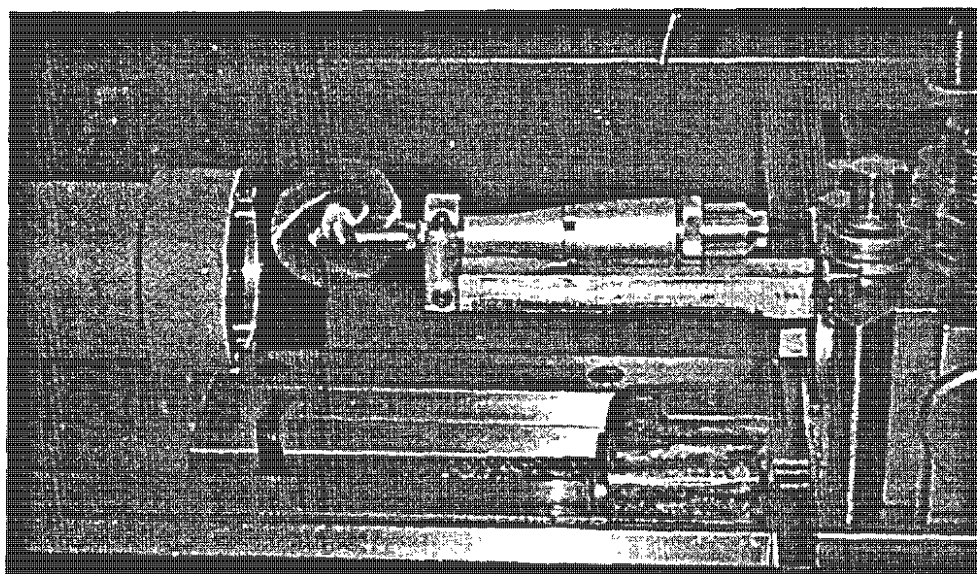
Dentist drill mounted on the lathe with the cylinder and cutter.
